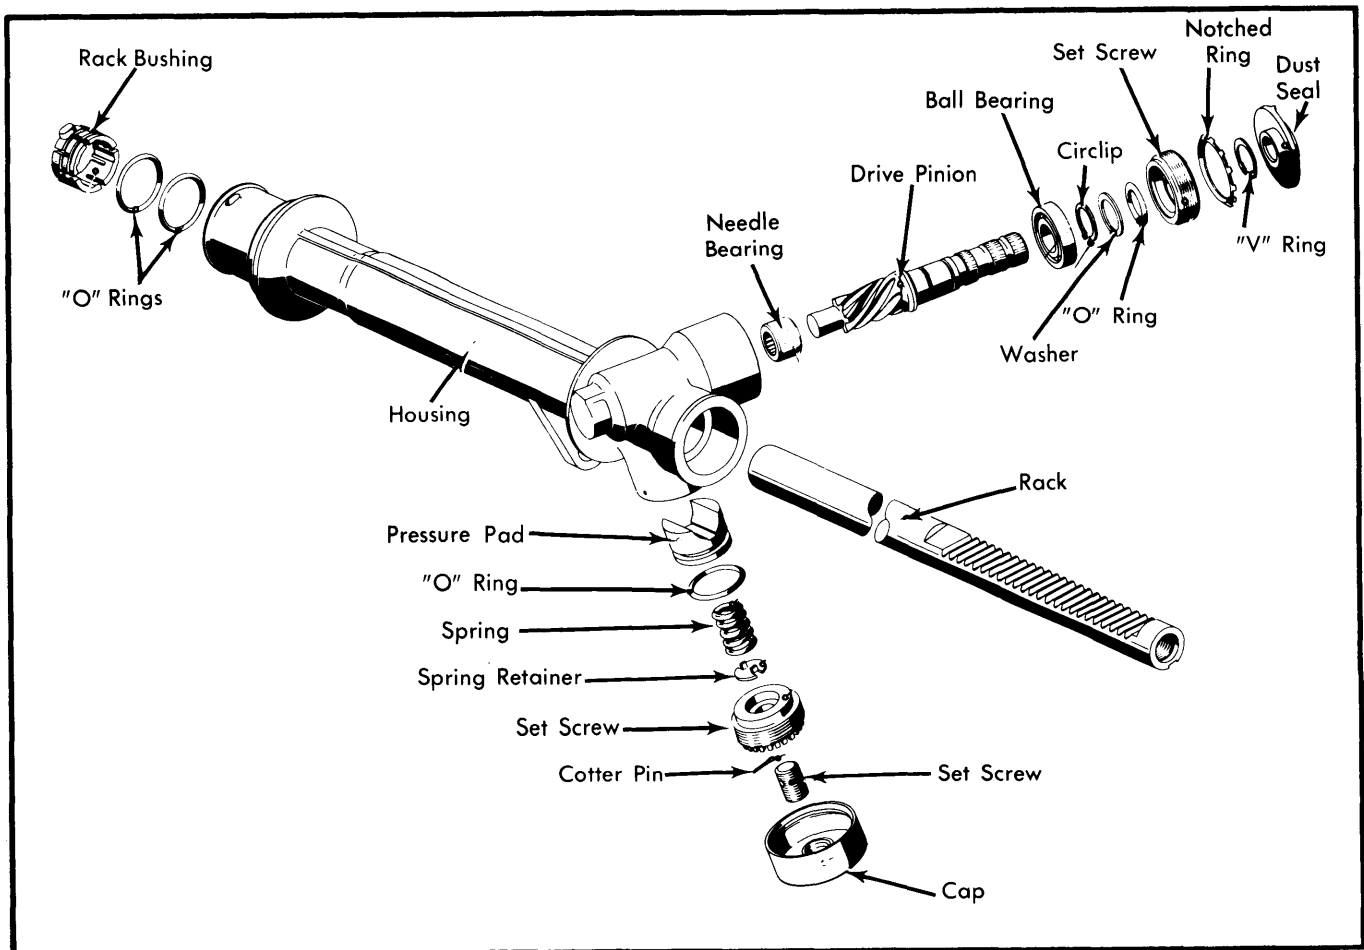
Exploded View of BMW Rack & Pinion Steering Gear Assembly
